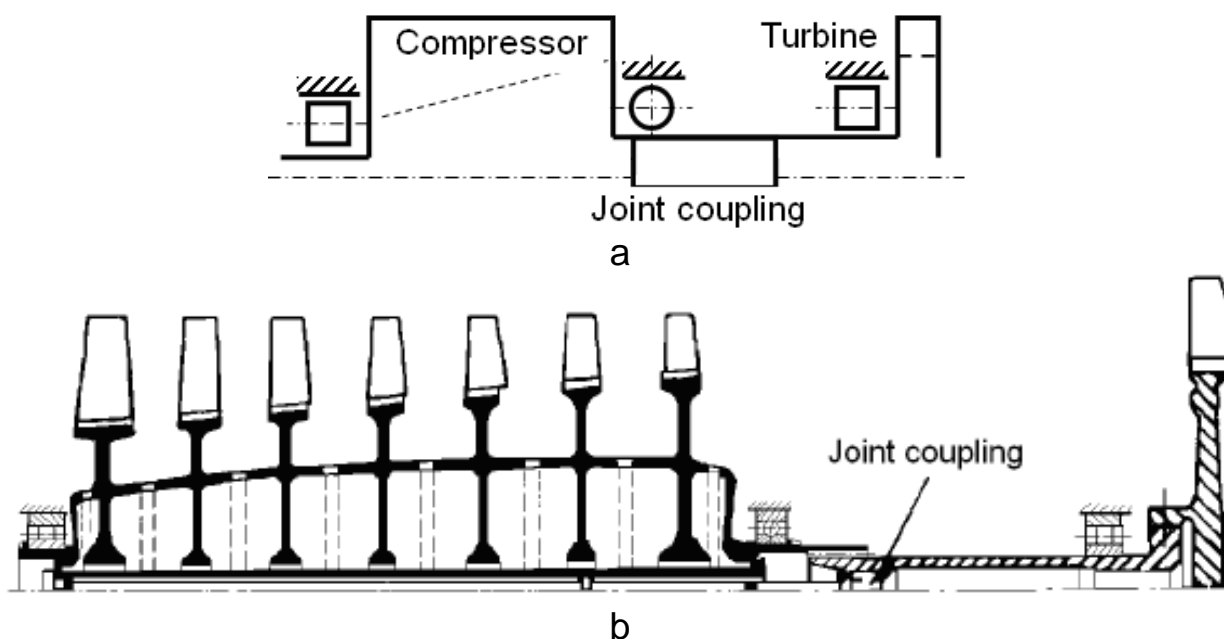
Three-support rotor with radial-thrust bearing placed after compressor and radial bearing placed before compressor and before turbine:
